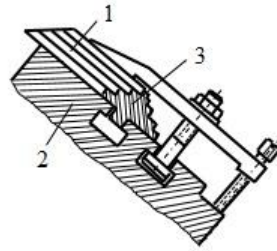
Mounting of knives on the table of a sharpening machine on the step plate:
